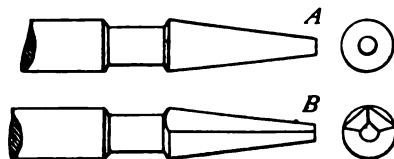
REAMERS USED FOR MAKING SMALL PLUG COCKS.
